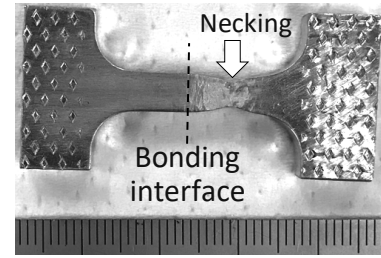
Appearance of the as forge-weld joint after tensile test
